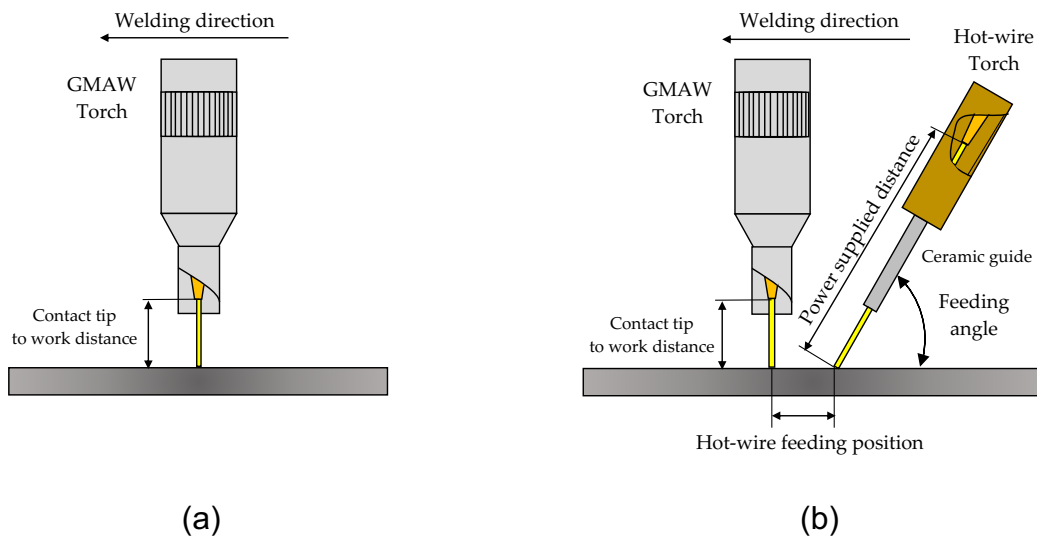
Welding experiment setups: (a) schematic diagram of solo GMAW; (b) schematic diagram of hot-wire GMAW with explained parameters
